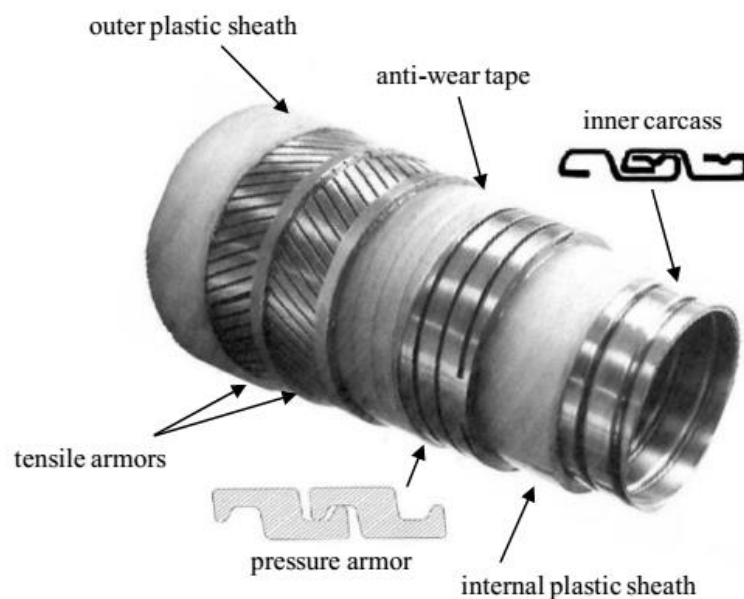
Typical flexible pipe structure (MERINO *et al.*, 2009).
